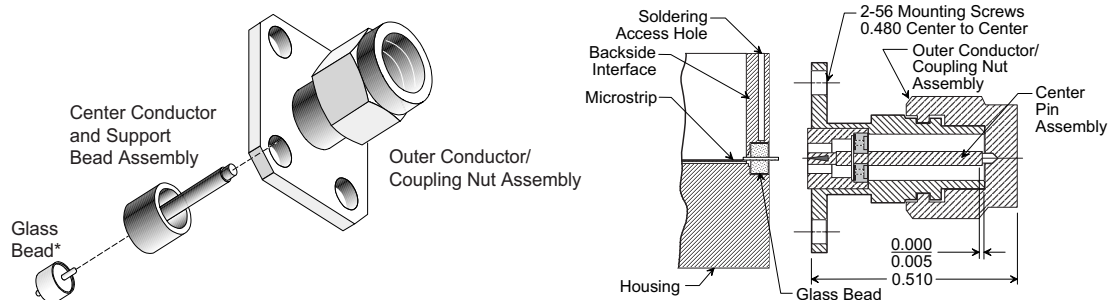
K104M-R or EK104M-R Assembly (*Glass Bead not supplied)
